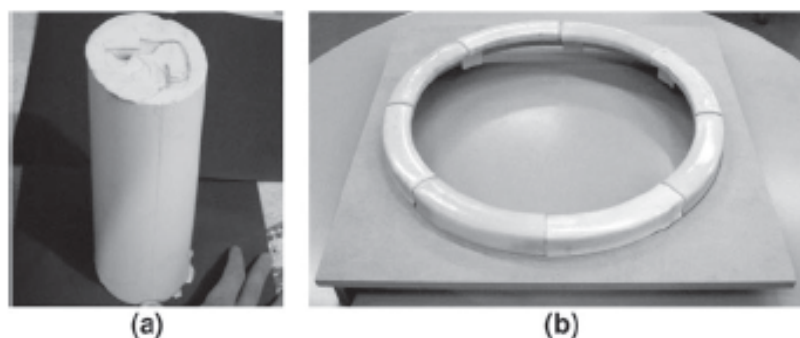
(a) Silicon mold from which the pushrim segments were produced in Polyurethane; (b) assembly of the pushrim.
